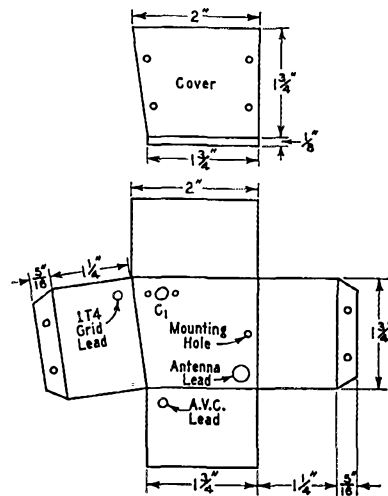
Details of the antenna-coil shield box. The material is thin copper, for easy soldering.
